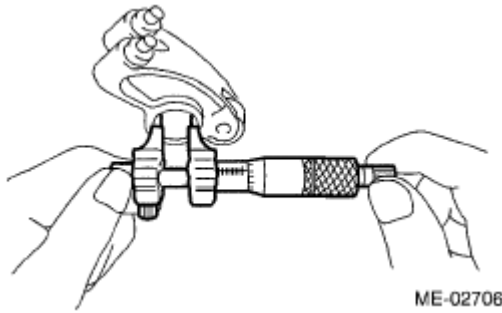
Measuring Inner Diameter Of Valve Rocker Arm
